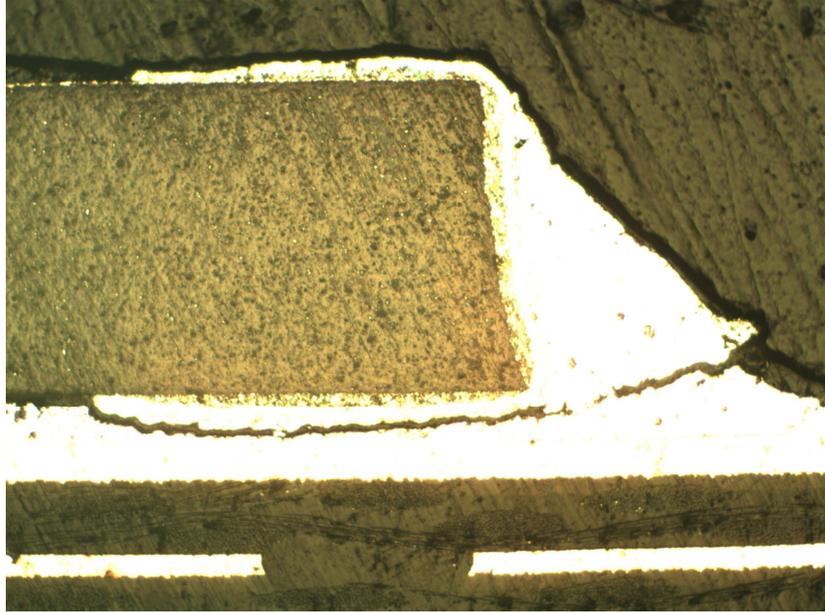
Hot Melt 2 on FLEX Test Board 2512 Resistor Image
